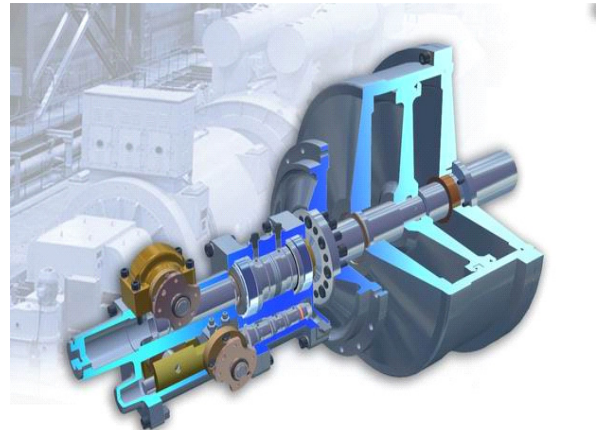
3-Dimension drawing of boiler fan pitch blade control actuator
